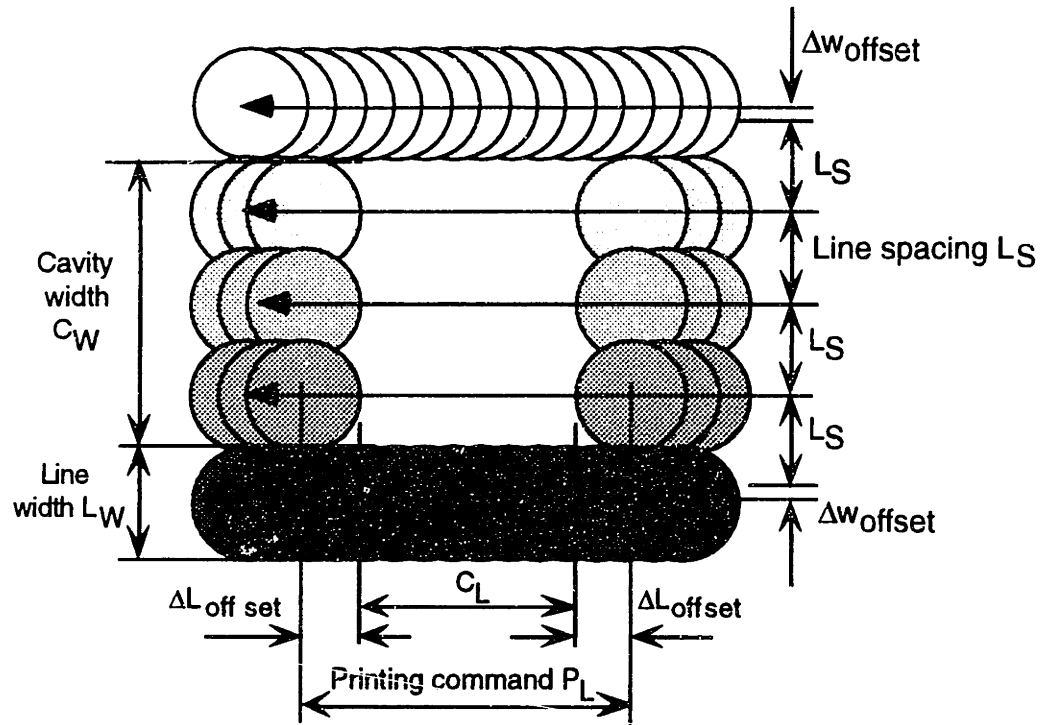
3D Printed mold cavity with $n=3$ lines removed.
